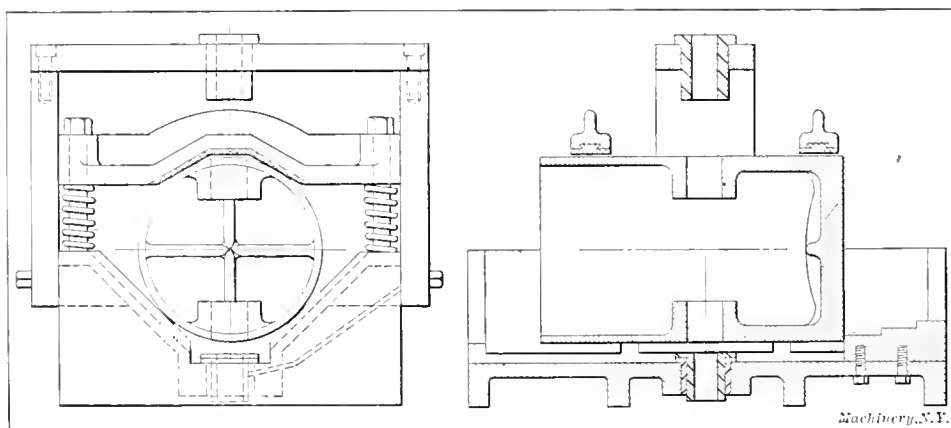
Elevation and Section of Jig for Piston Boring with Work in Place
